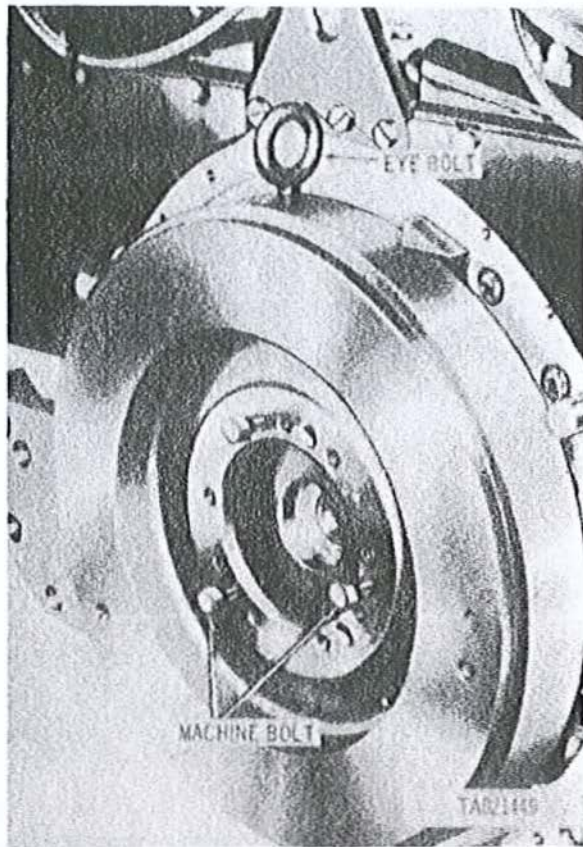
Removing flywheel, model AVDS-1790-2C and AVDS-1790-2D engines.
